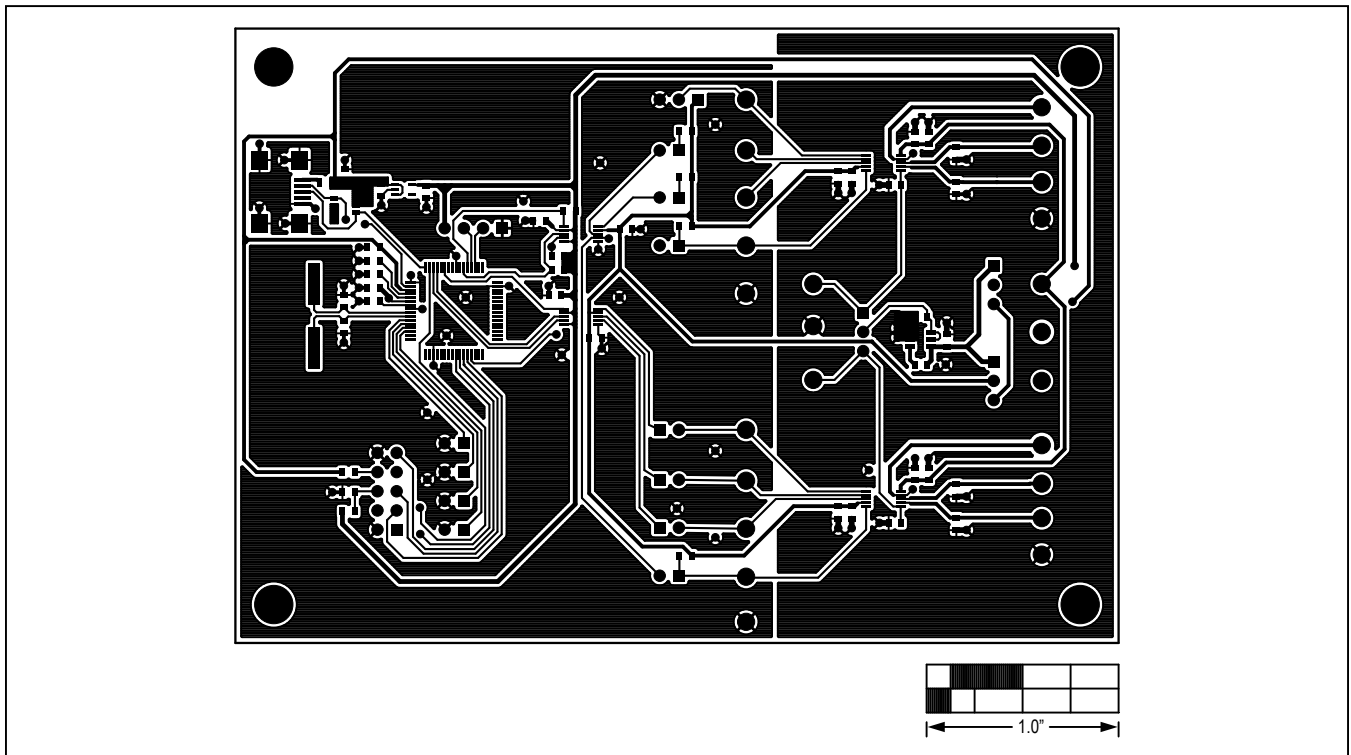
MAX5X02 EV Kit PCB Layout—Component Side
